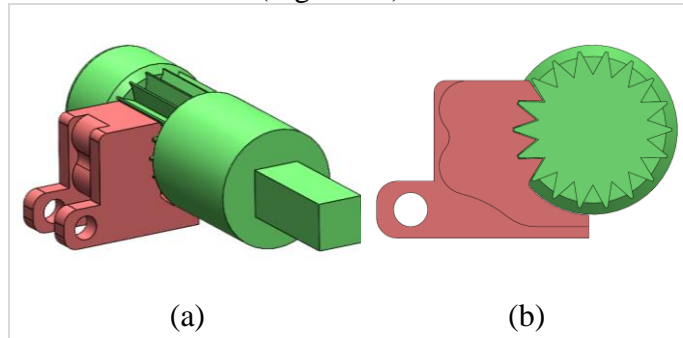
Assembly (a) and Cut View (b) of the Gear and Lock
